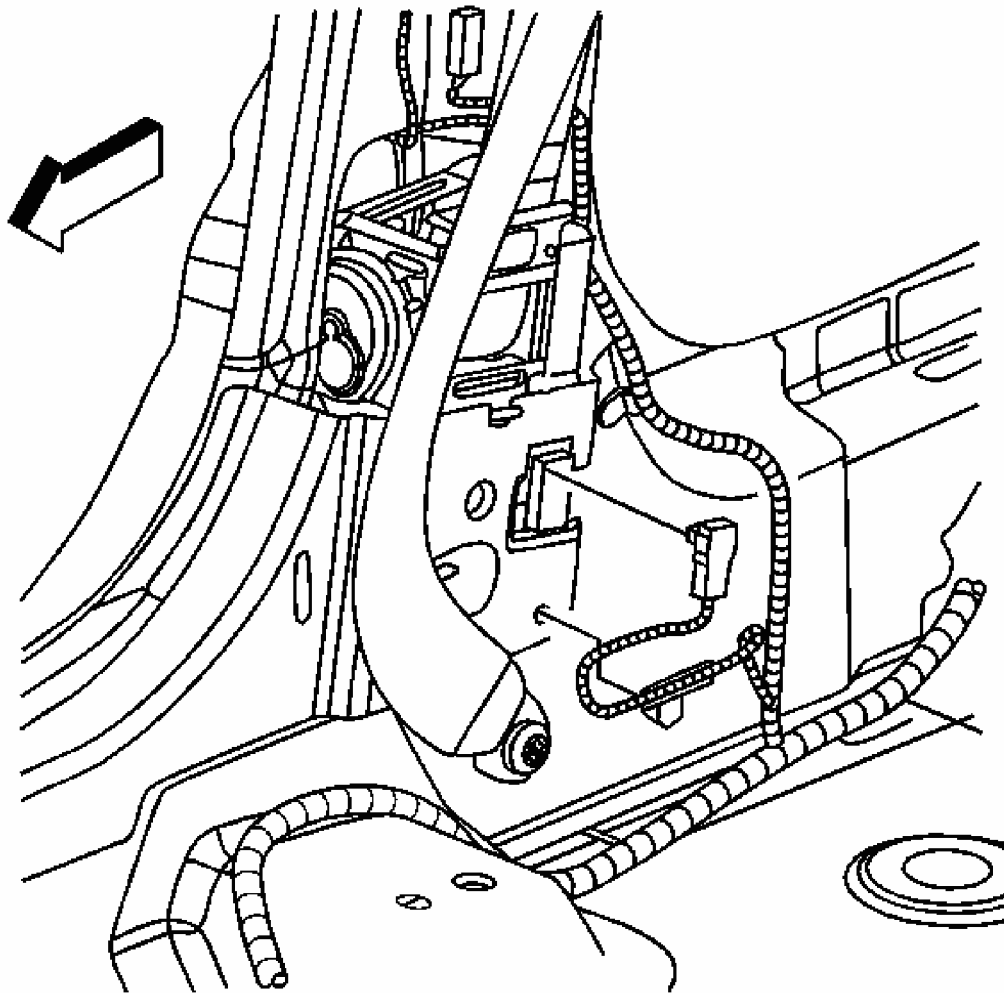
View Of Seat Belt Pretensioner Connector And Wiring Harness Routing
